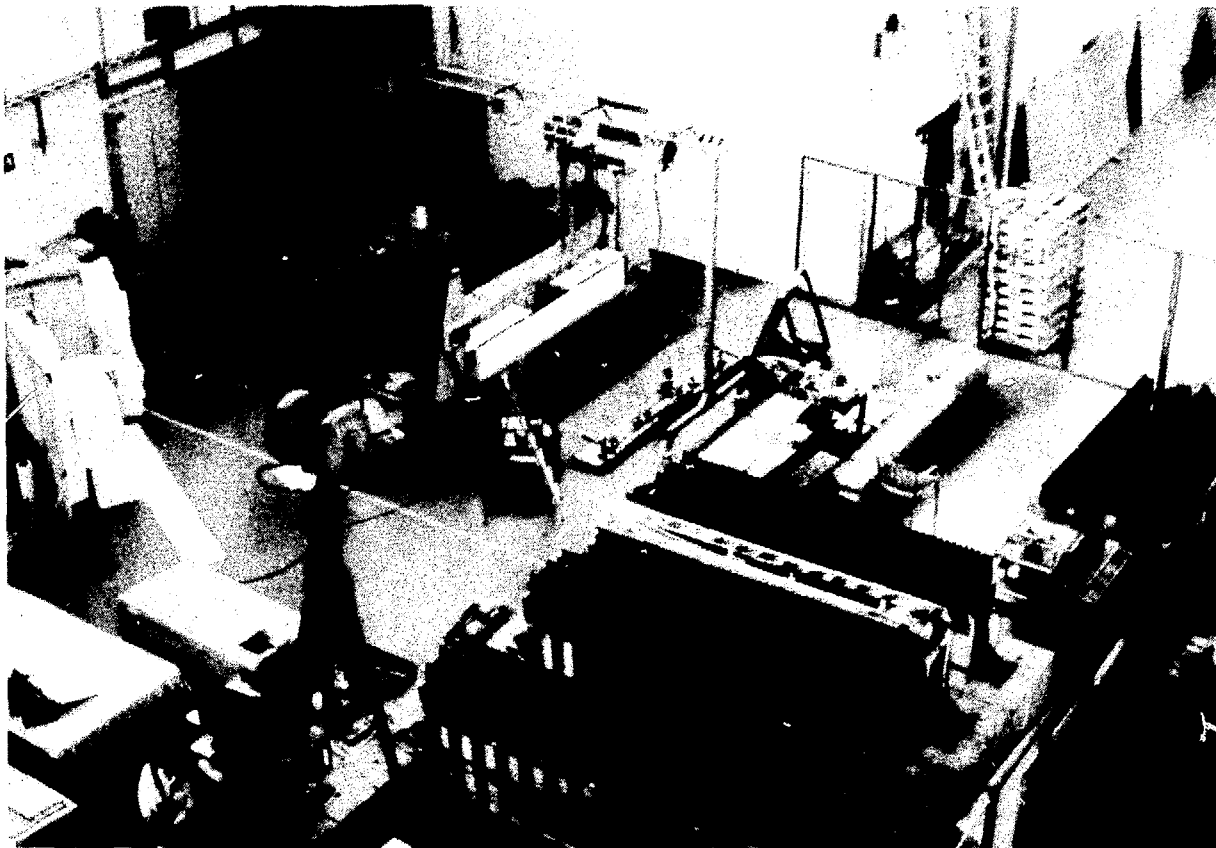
The ZEUS BCAL module assembly area at the KFA-Juelich Laboratory.
